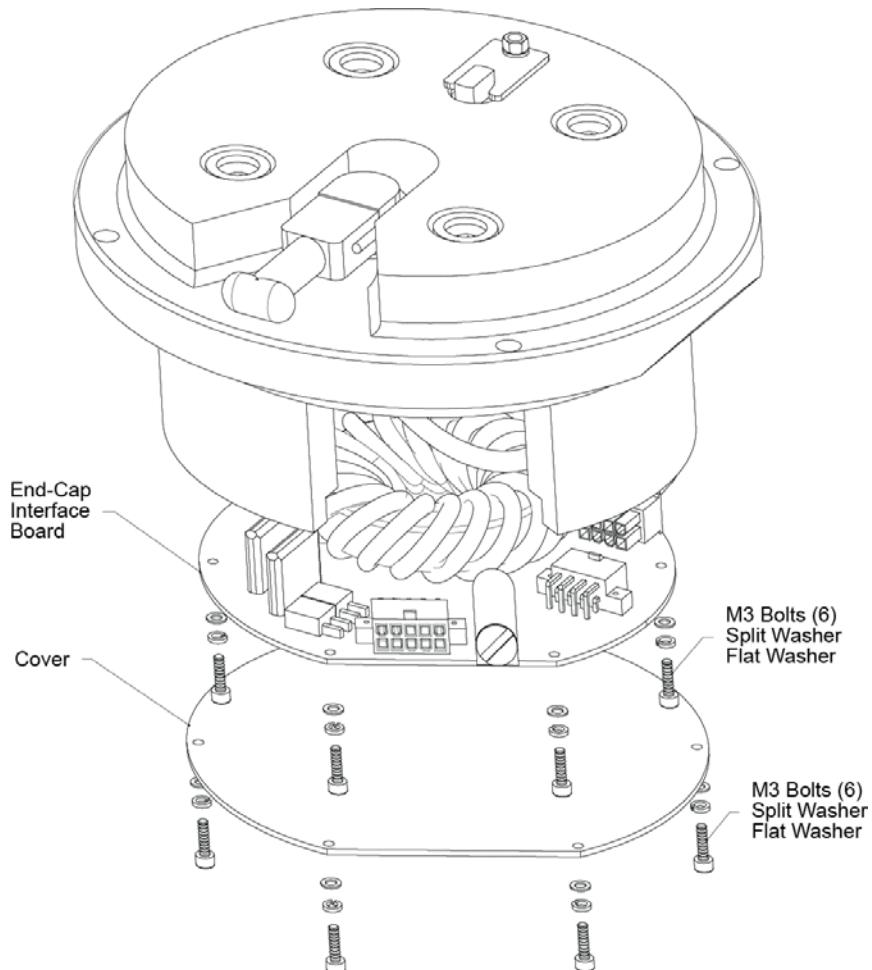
Long Ranger / QuarterMaster End-Cap Assembly
